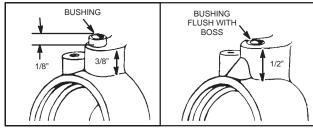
INSTALLING BREAKER POINT BUSHING
